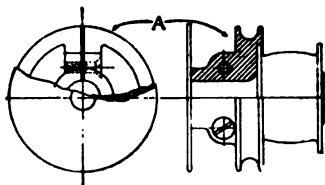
Method of mounting new fan pulley, over old one for Fisher system
